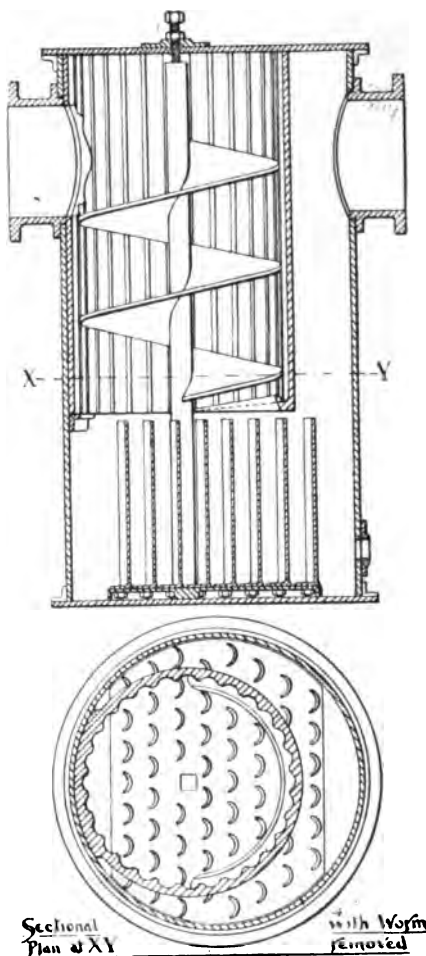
Sectional view of "Empire" Patent Oil Separator.
